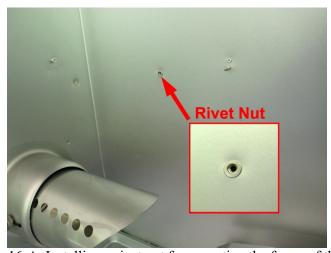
A. Installing a rivet nut for mounting the frame of the fan.
